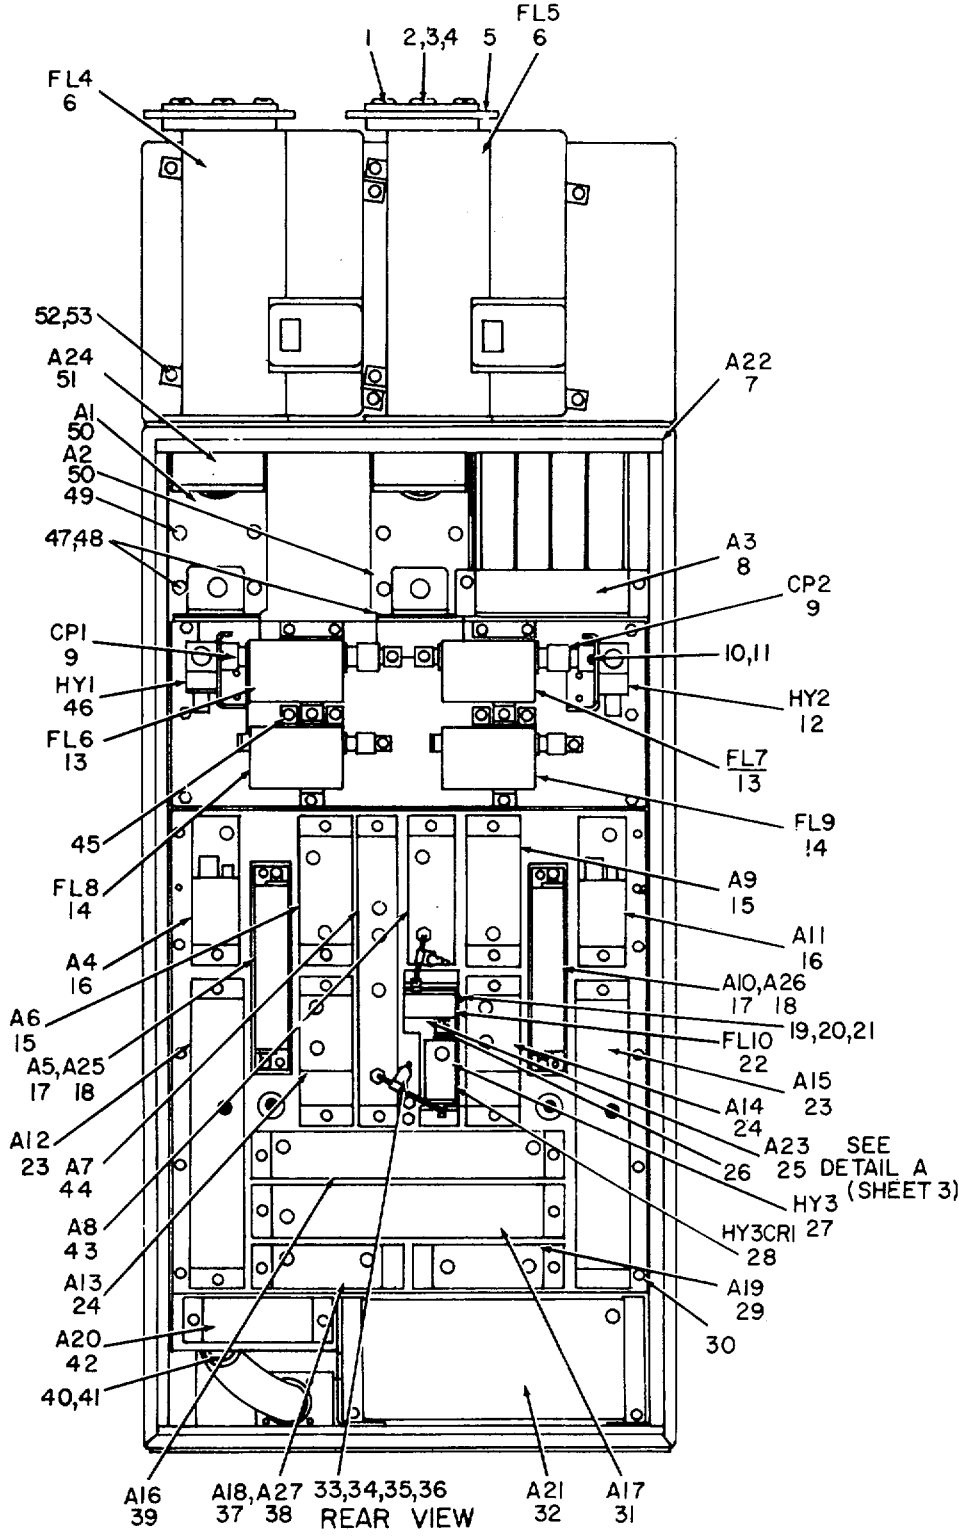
Cabinet, Electrical Equipment 1A16 (Sheet 3 of 3).
